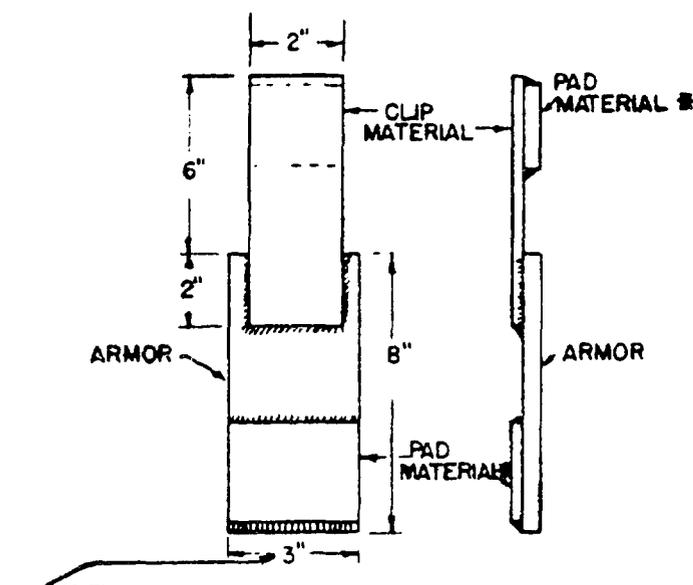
Ballistic shock test-weld specimen.
